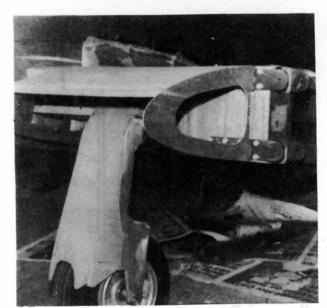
Landing gear with foam foundation for fairing sanded to shape.
